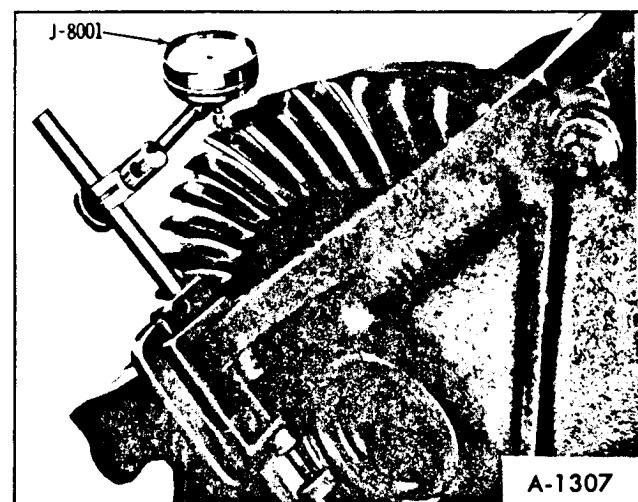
Checking Ring Gear to Pinion Gear Backlash
